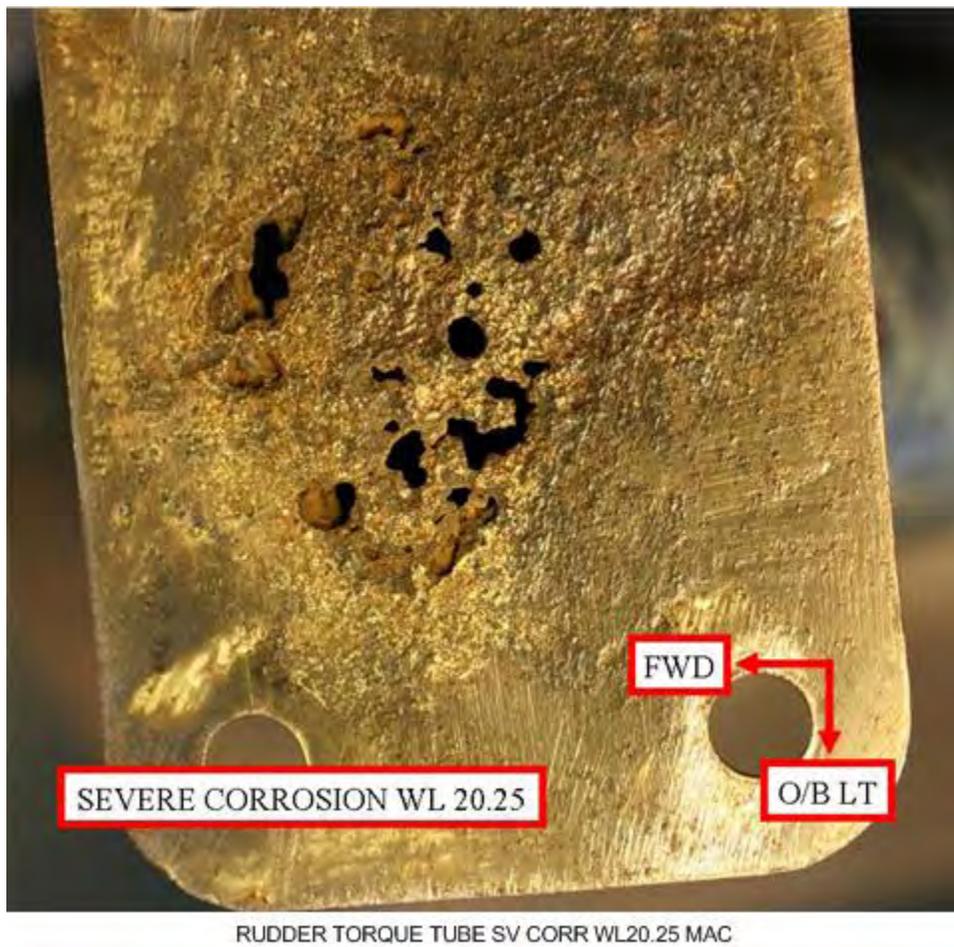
Macroscopic View of Severe Corrosion on the Rudder Torque Tube Assembly WL 20.25
